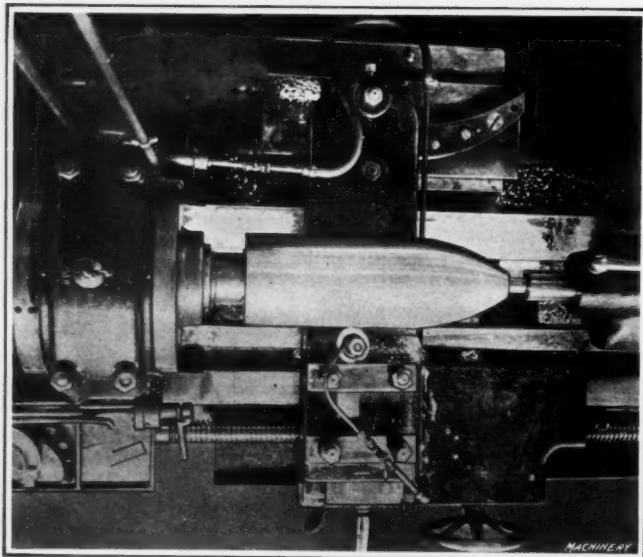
Close View of Lathe tooled up for performing Finish-turning Operation
